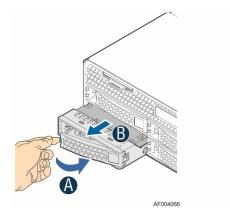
Installing Hot-swap storage devices – 3.5" carrier extraction
